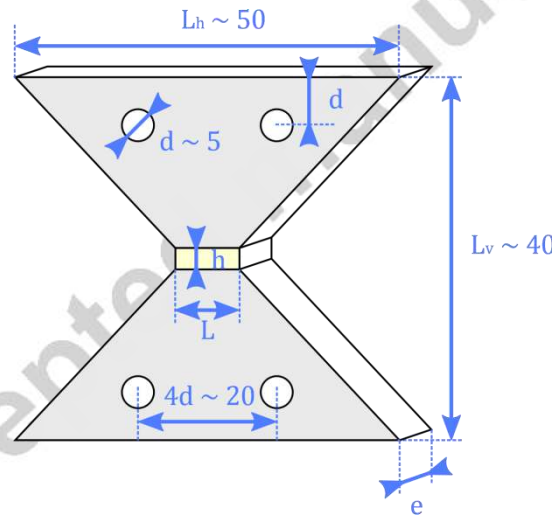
ARCAN geometry. Typical dimensions are given in millimeters.
